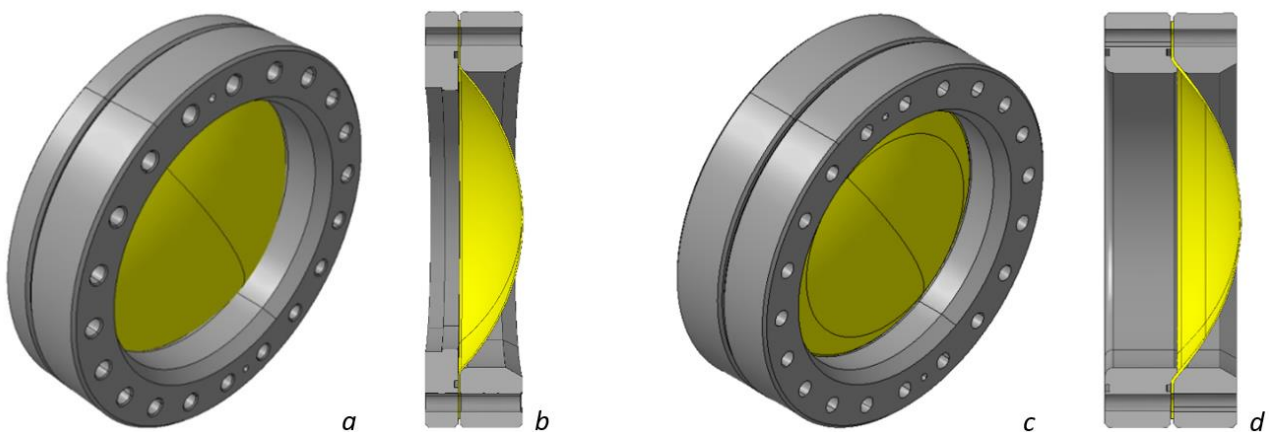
3D models of both window sets used in this study: a, b Set1 isometric and section view respectively; c, d Set2 isometric and section view respectively.
